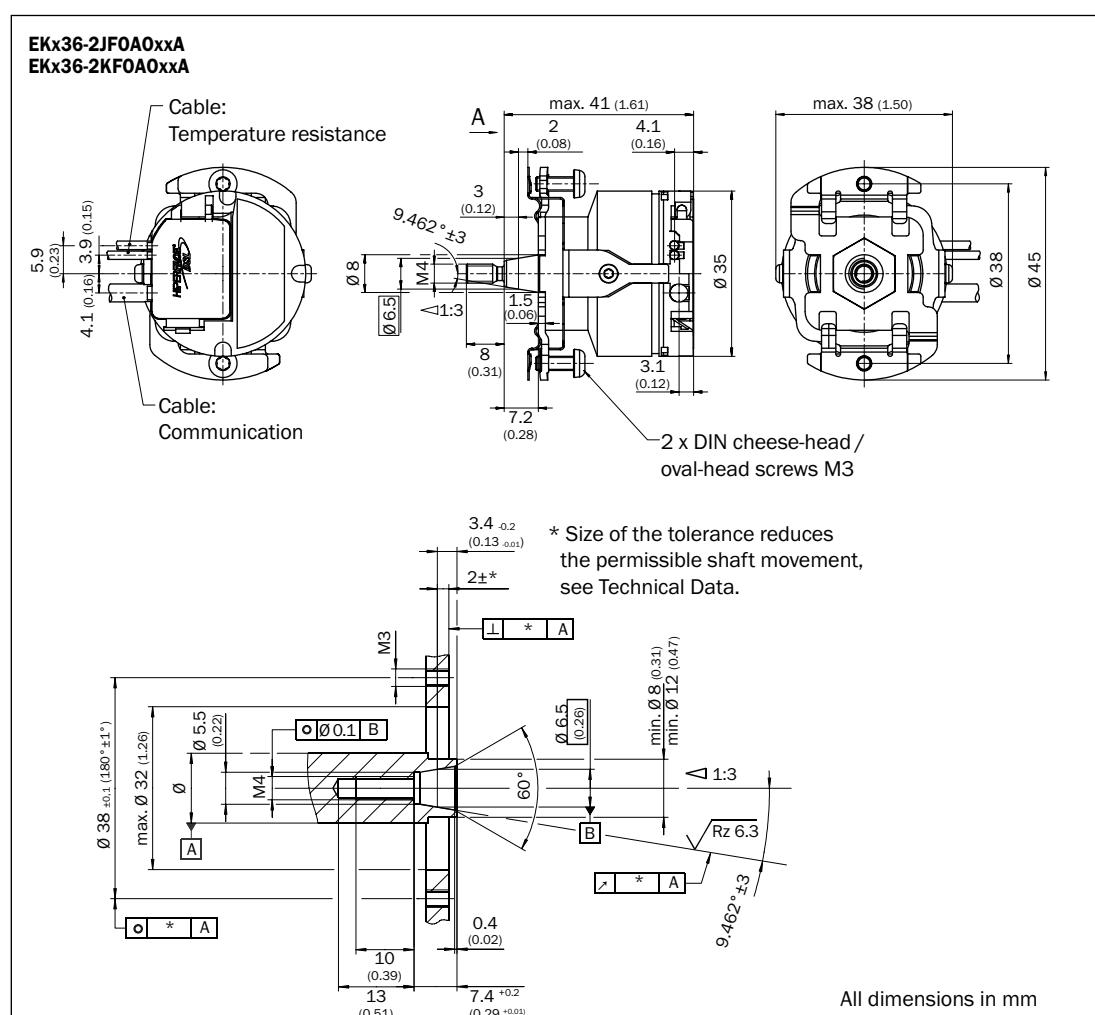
Dimension illustration and mounting suggestion for EKS36-2 / EKM36-2 tapered shaft
